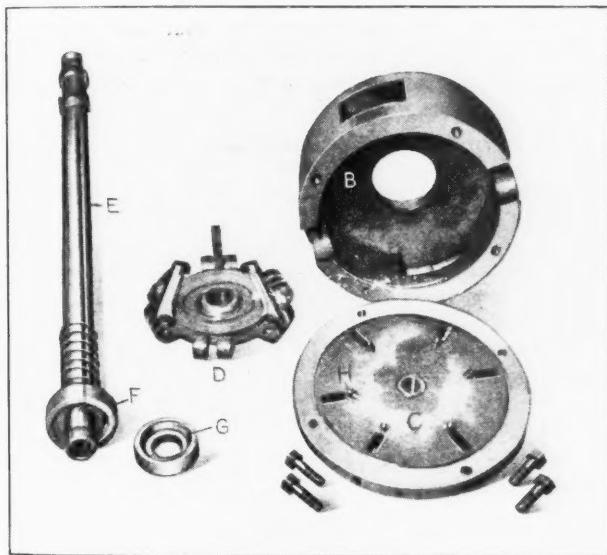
Parts of the Quick-acting Chuck shown mounted in Place on the Turret Lathe in Fig. 2
